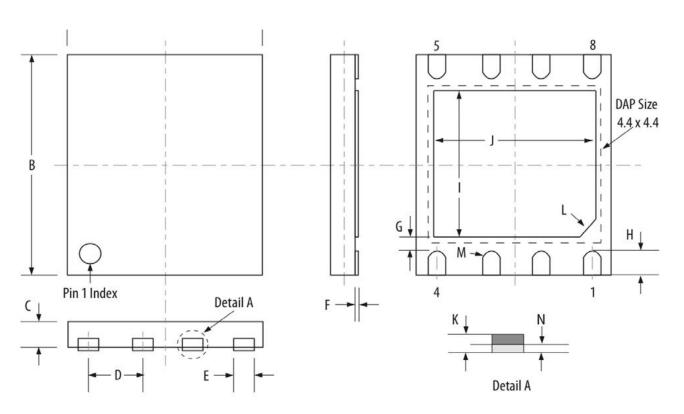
PACKAGE OUTLINE 5x6 mm 8-LAND DFN LARGE FLAG (DESIGNATOR DC)
